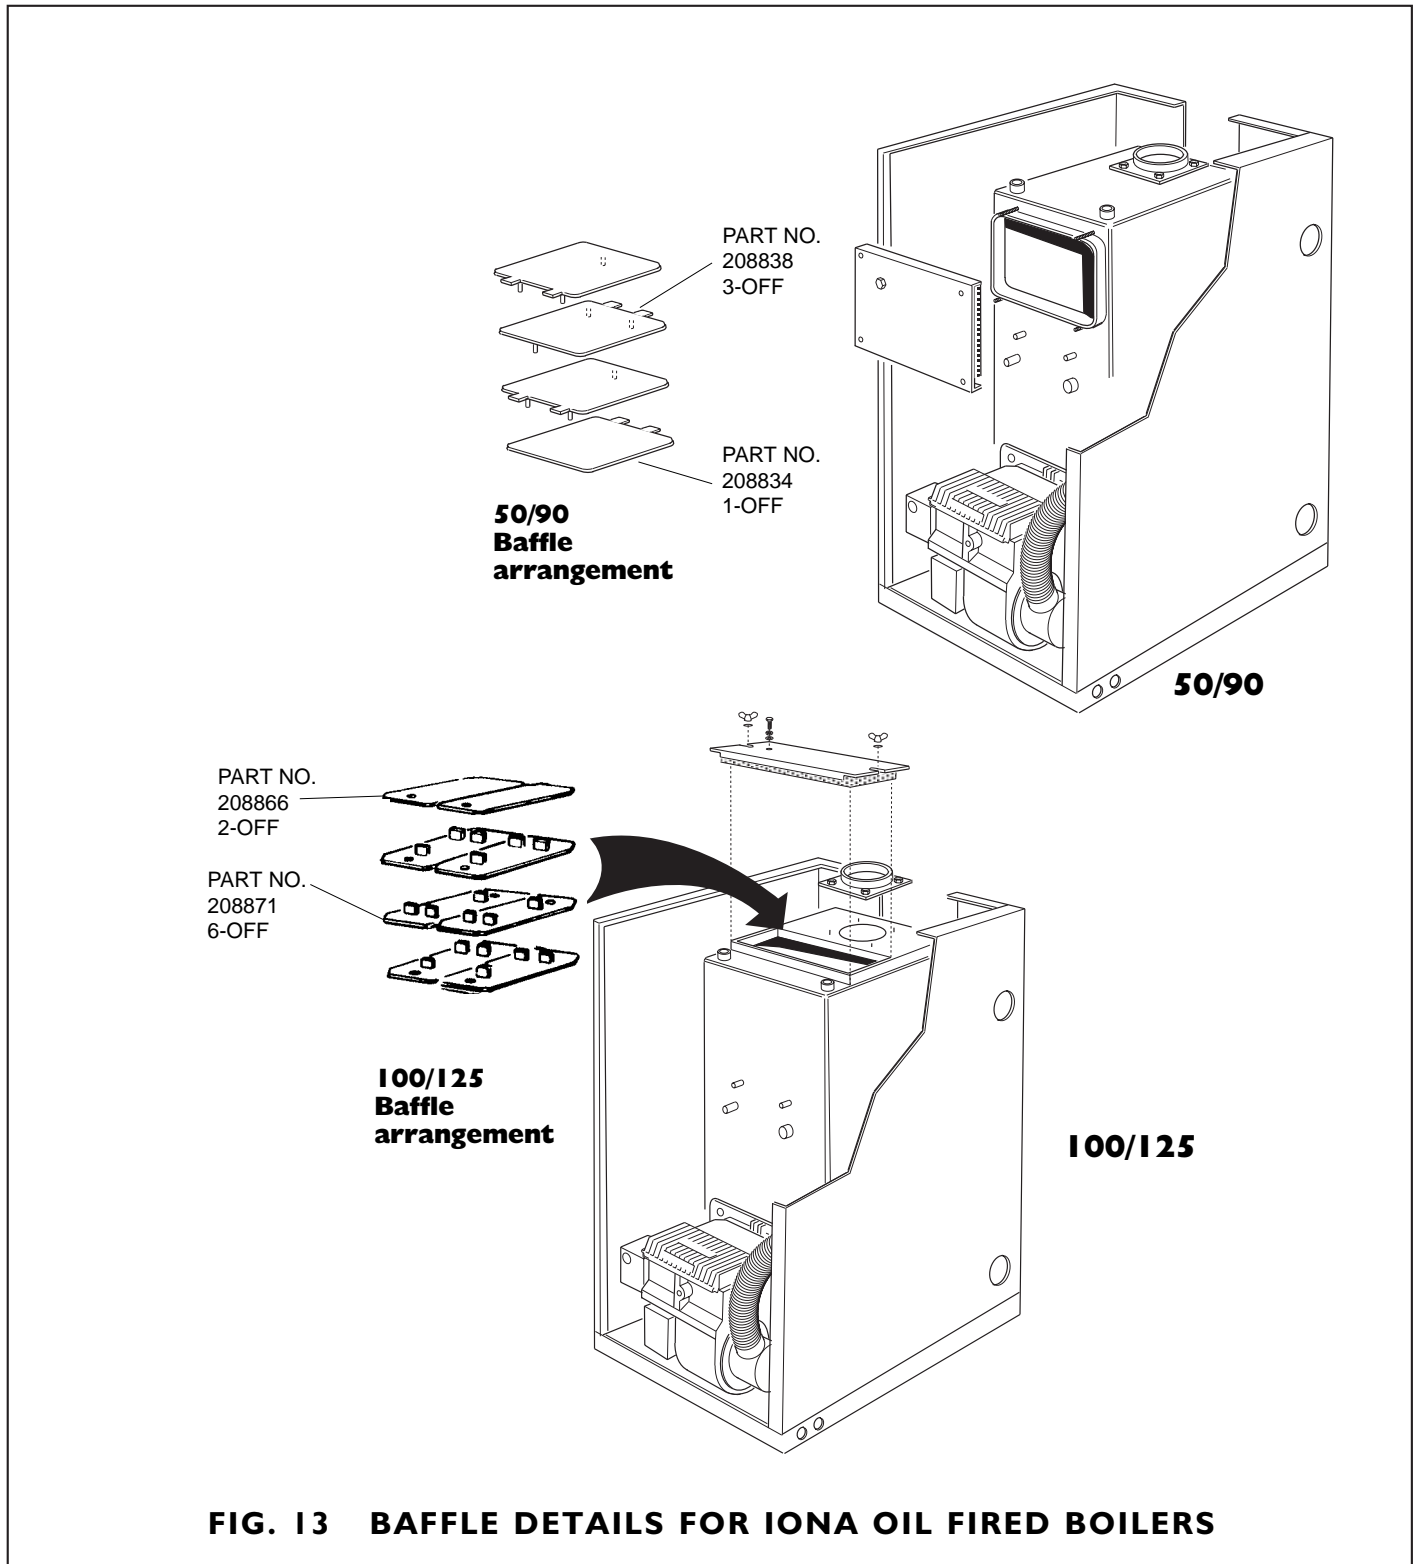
BAFFLE DETAILS FOR IONA OIL FIRED BOILERS
